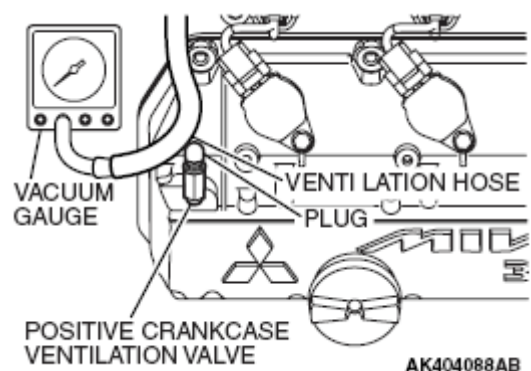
Identifying Ventilation Hose, Positive Crankcase Ventilation (PCV) Valve And Vacuum Gauge
